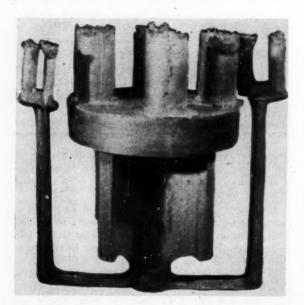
Manganese bronze valve stem. Yield of 78.5 per cent was achieved on this 259-lb casting by using four 3½-in. I.D. insulated risers poured 5½ in. high.
